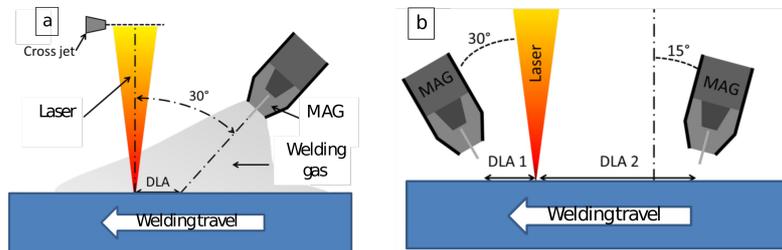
a) "classical" hybrid Laser Mag welding process, b) Bicathodes hybrid Laser MAG welding process.
